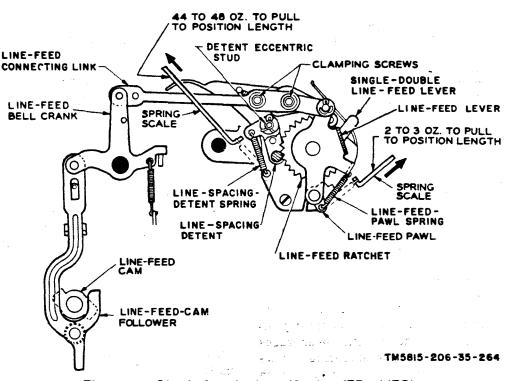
Line-feed mechanism, side view (TT-4A/TG).
